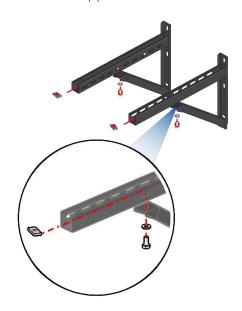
Mounting base plate with condensate drain at bottom and "downward wall support & cross-bar"
